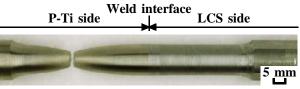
Example of appearance of joint tensile test specimen with P-Ti base metal fracture after tensile testing.
